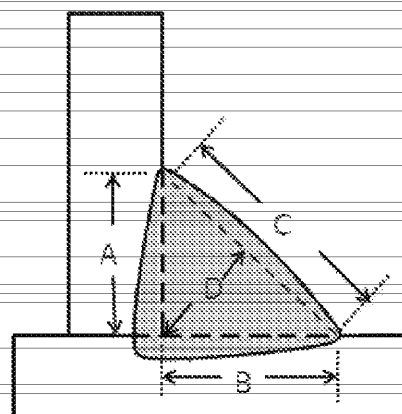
Weld fillet and throat size measurements. A: Leg size. B: Leg size. C: Largest 90° triangle you can fit in the weld. D: Throat size.
